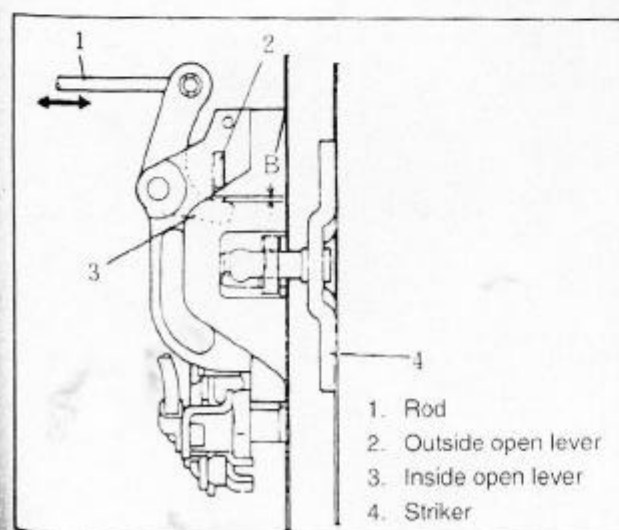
16 DOOR INSIDE HANDLE ATTACHMENT
